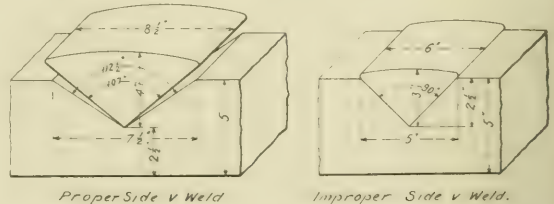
Proper and Improper Methods of Making a Side V Weld.
